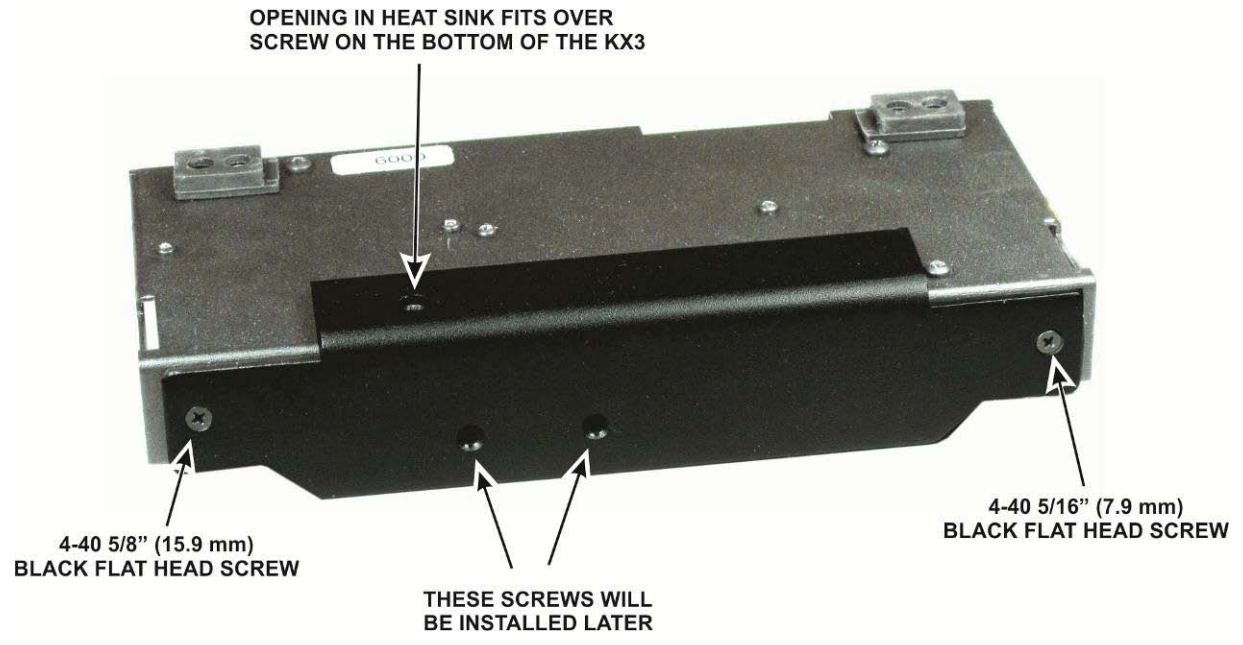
Mounting the Heat Sink on the Bottom Cover.
